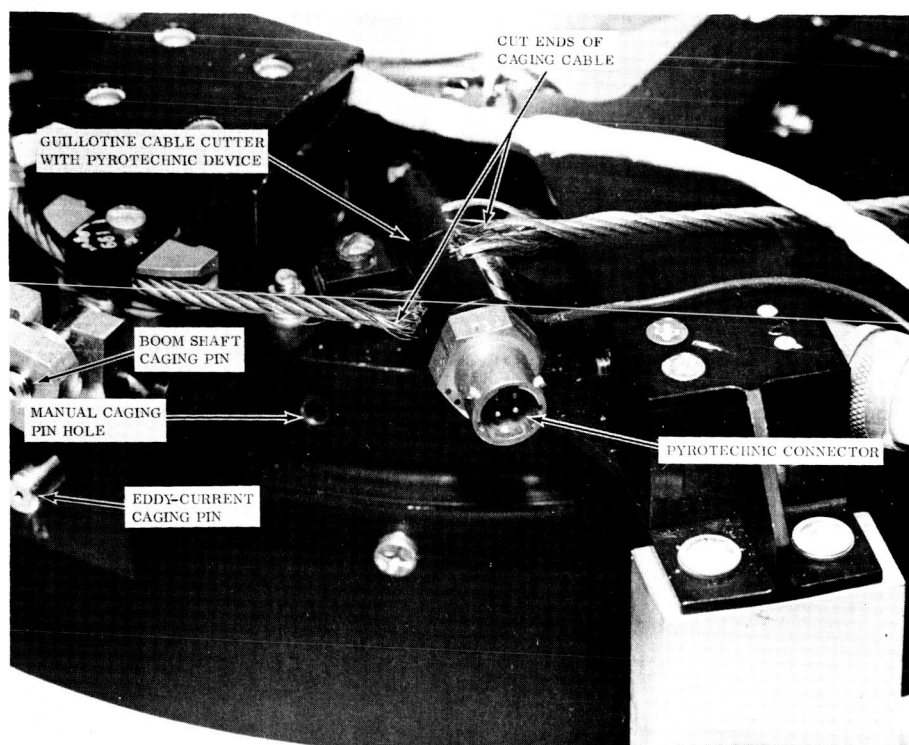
Caging Cable (at Pyrotechnic Device 1) After Uncaging Operation, CPD Engineering Unit 1
